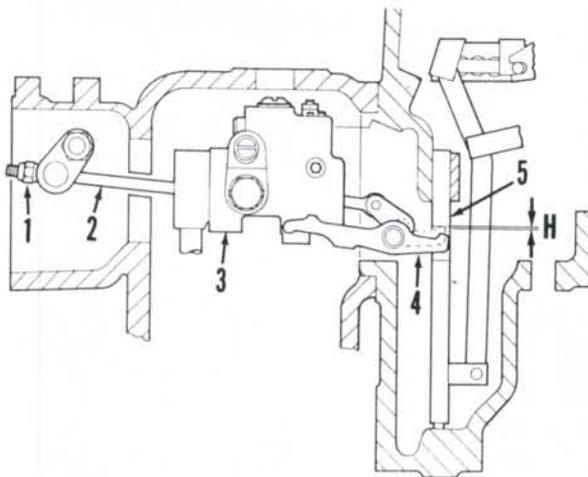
Adjust control rod nut (1) to provide 2 mm (0.080 inch) gap (H) between rocker lever and sliding bar. Refer to paragraph 319.
